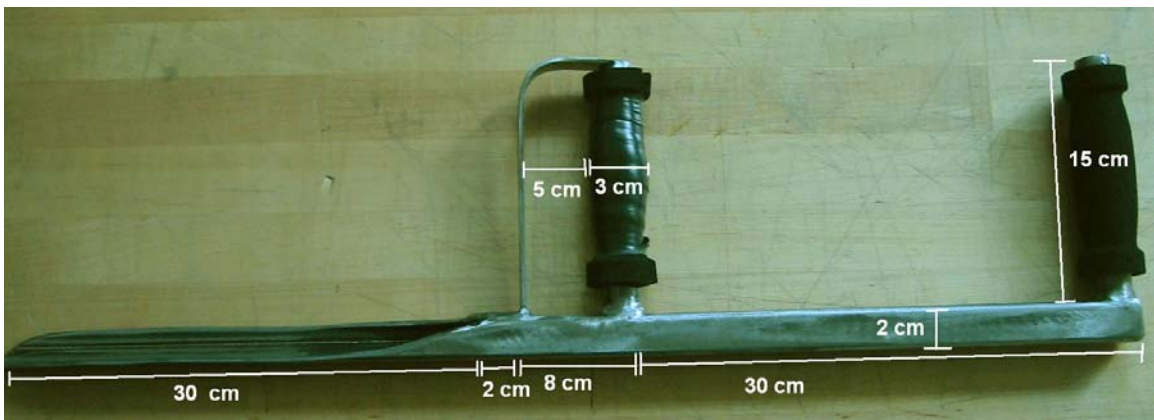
Prototype made by Carl Dietrich, 2003. Note $\frac{3}{4}$ " handguard, bike handle grips, and welded joints.
